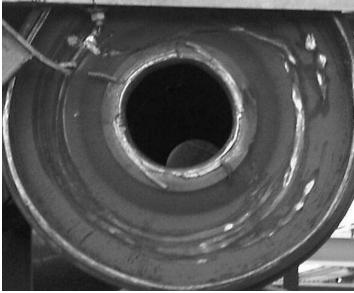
Pulley after Shaft Failure at 380% of Design Load
